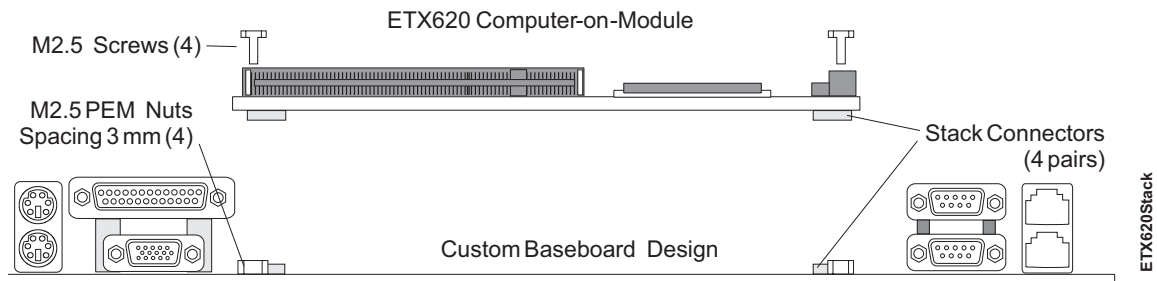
ETX 620 Module and Custom Baseboard Assembly
